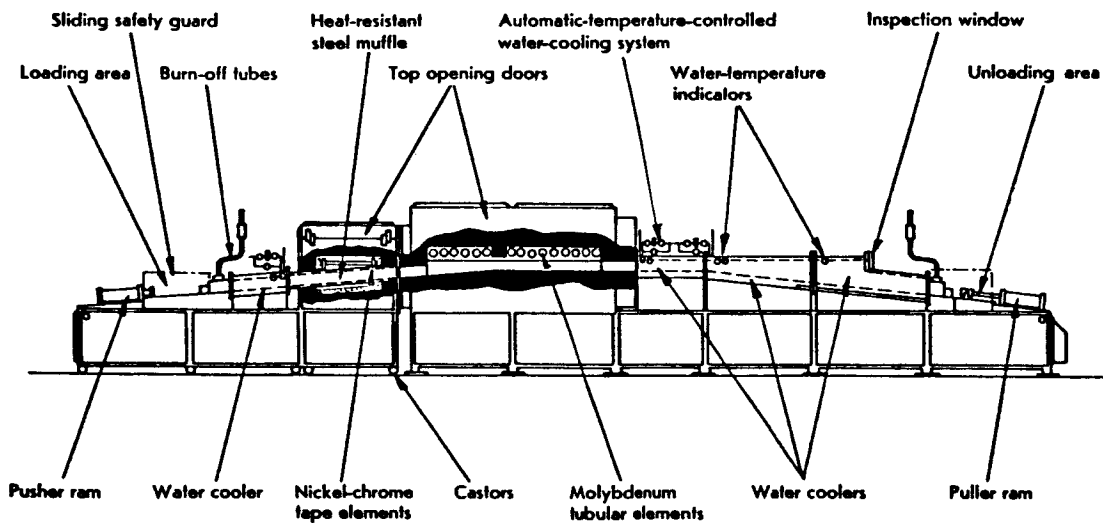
HUMPED-BACK, BOAT-TYPE, PUSH-PULL FURNACE (REF. 172)
